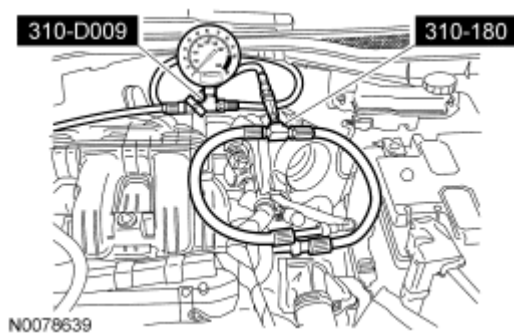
Identifying Fuel Tube, Fuel Rail & Special Tool (310-D009, 310-180)
